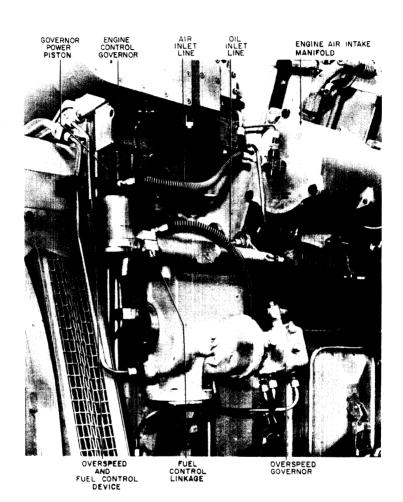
View of overspeed and fuel control device mounted on engine
